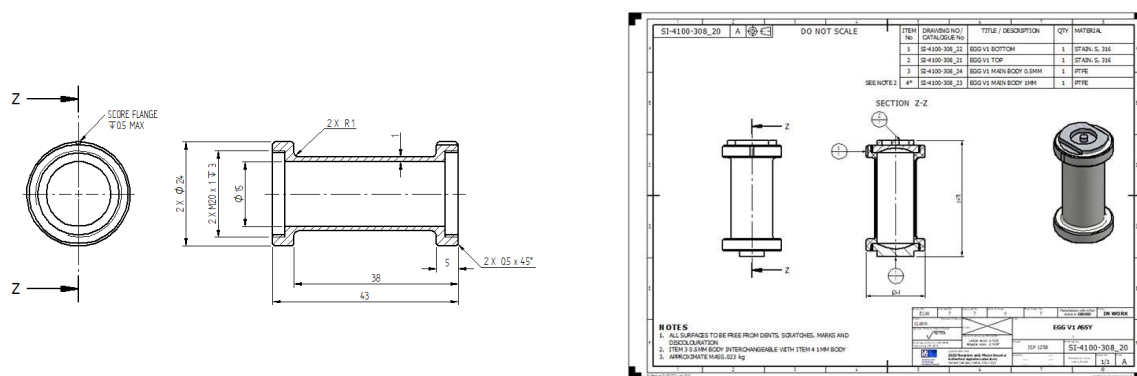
Bespoke cylindrical PTFE ball mill reactor engineering drawings
